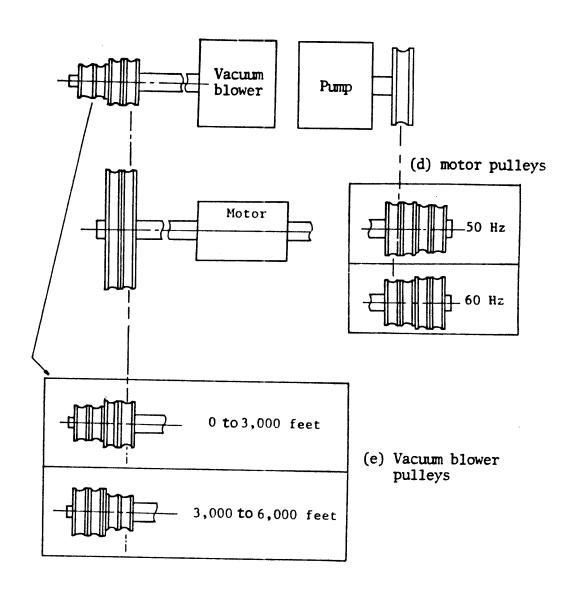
Air supply unit: vacuum blower and motor pulleys.
